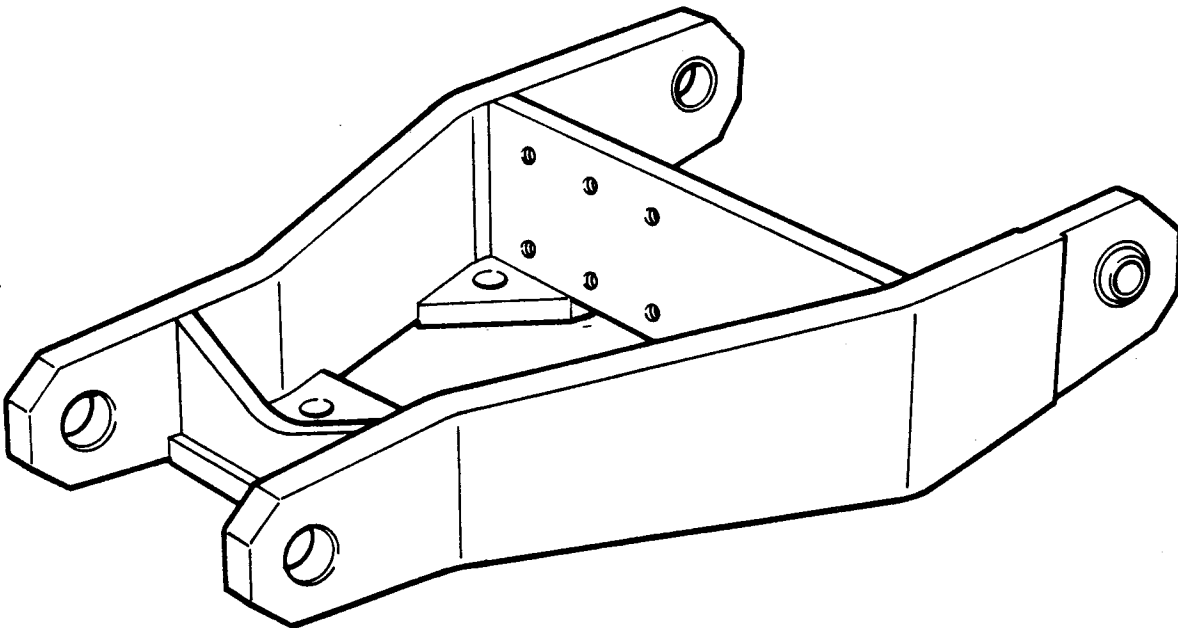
SUPPORT ASSEMBLY, ELEVATION DRIVE (1D22439-1)
